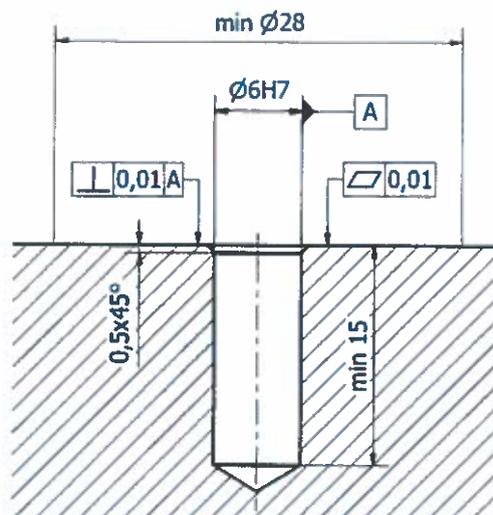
Reference hole: Diameter 6H7 hole, 28 mm contact surface, 15 mm depth
